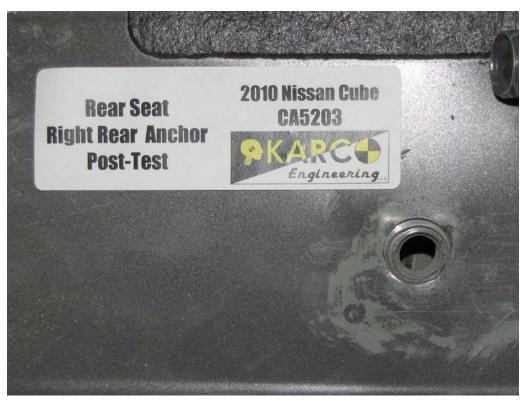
Floor Pan Anchor, P3, Post-Test
